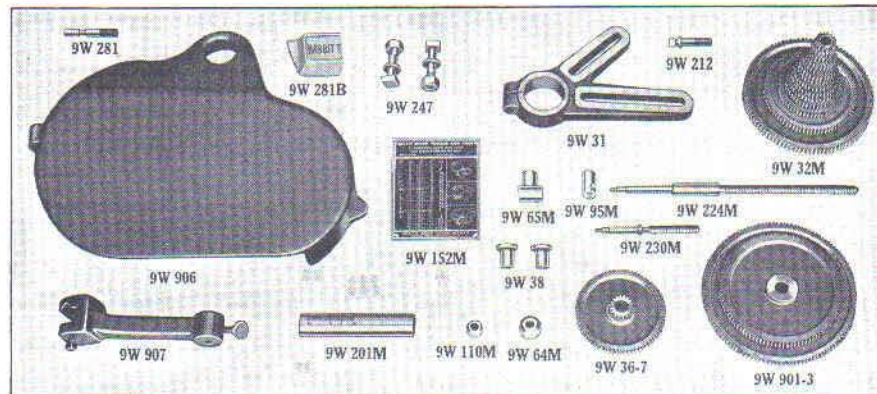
Metric Parts for 9-inch "Workshop" South Bend Lathes.
